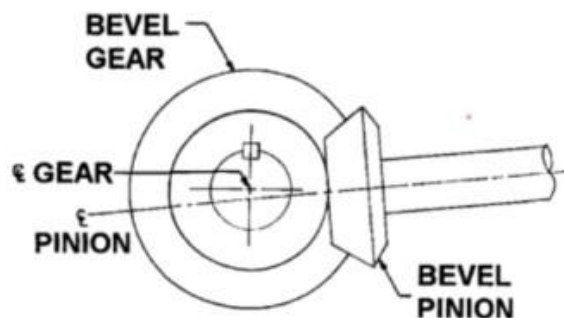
Illustration of cross bearing in bevel gears from the AASHTO Movable Bridge Inspection, Evaluation, and Maintenance Manual.
